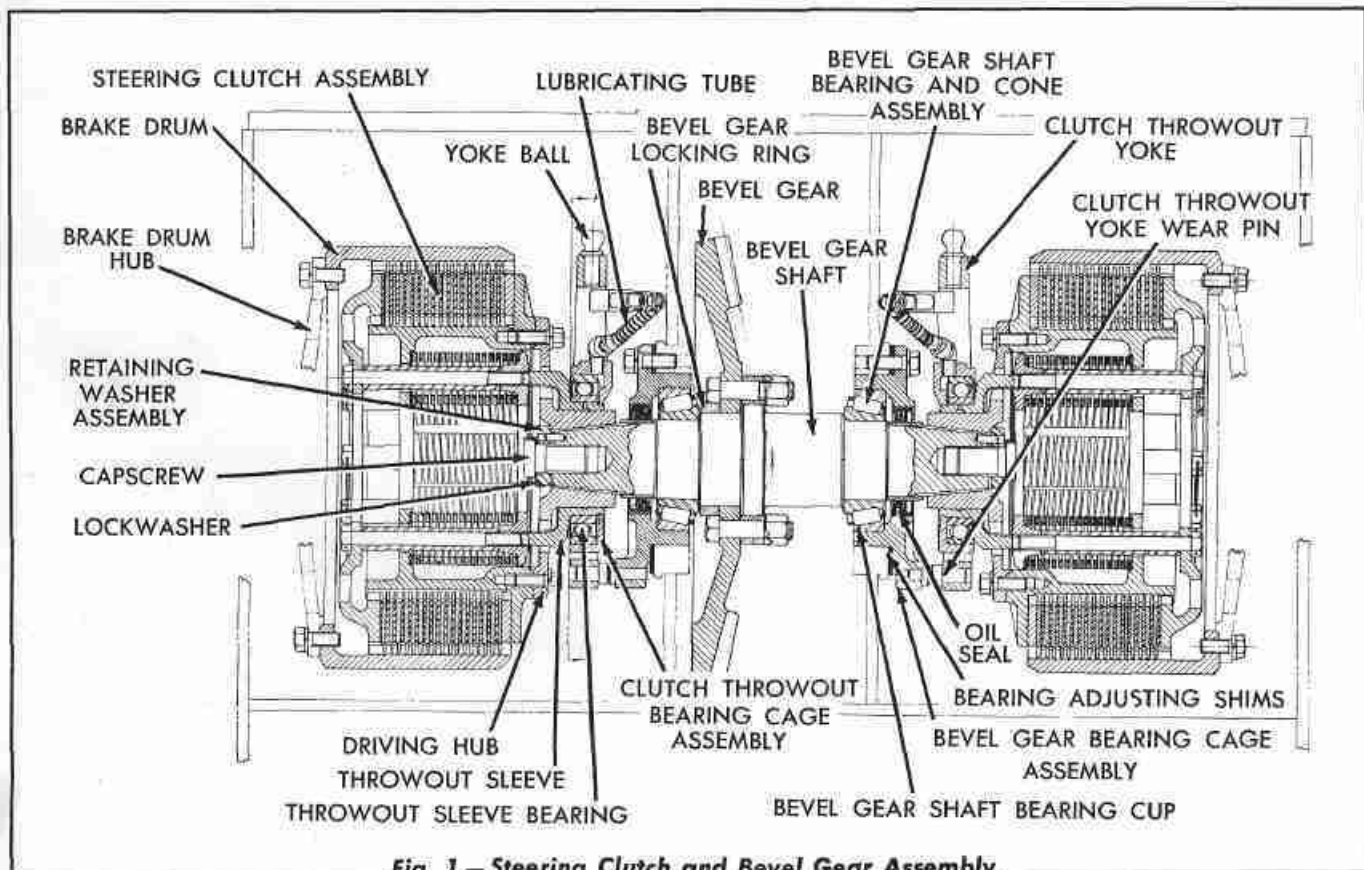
Steering Clutch and Bevel Gear Assembly
